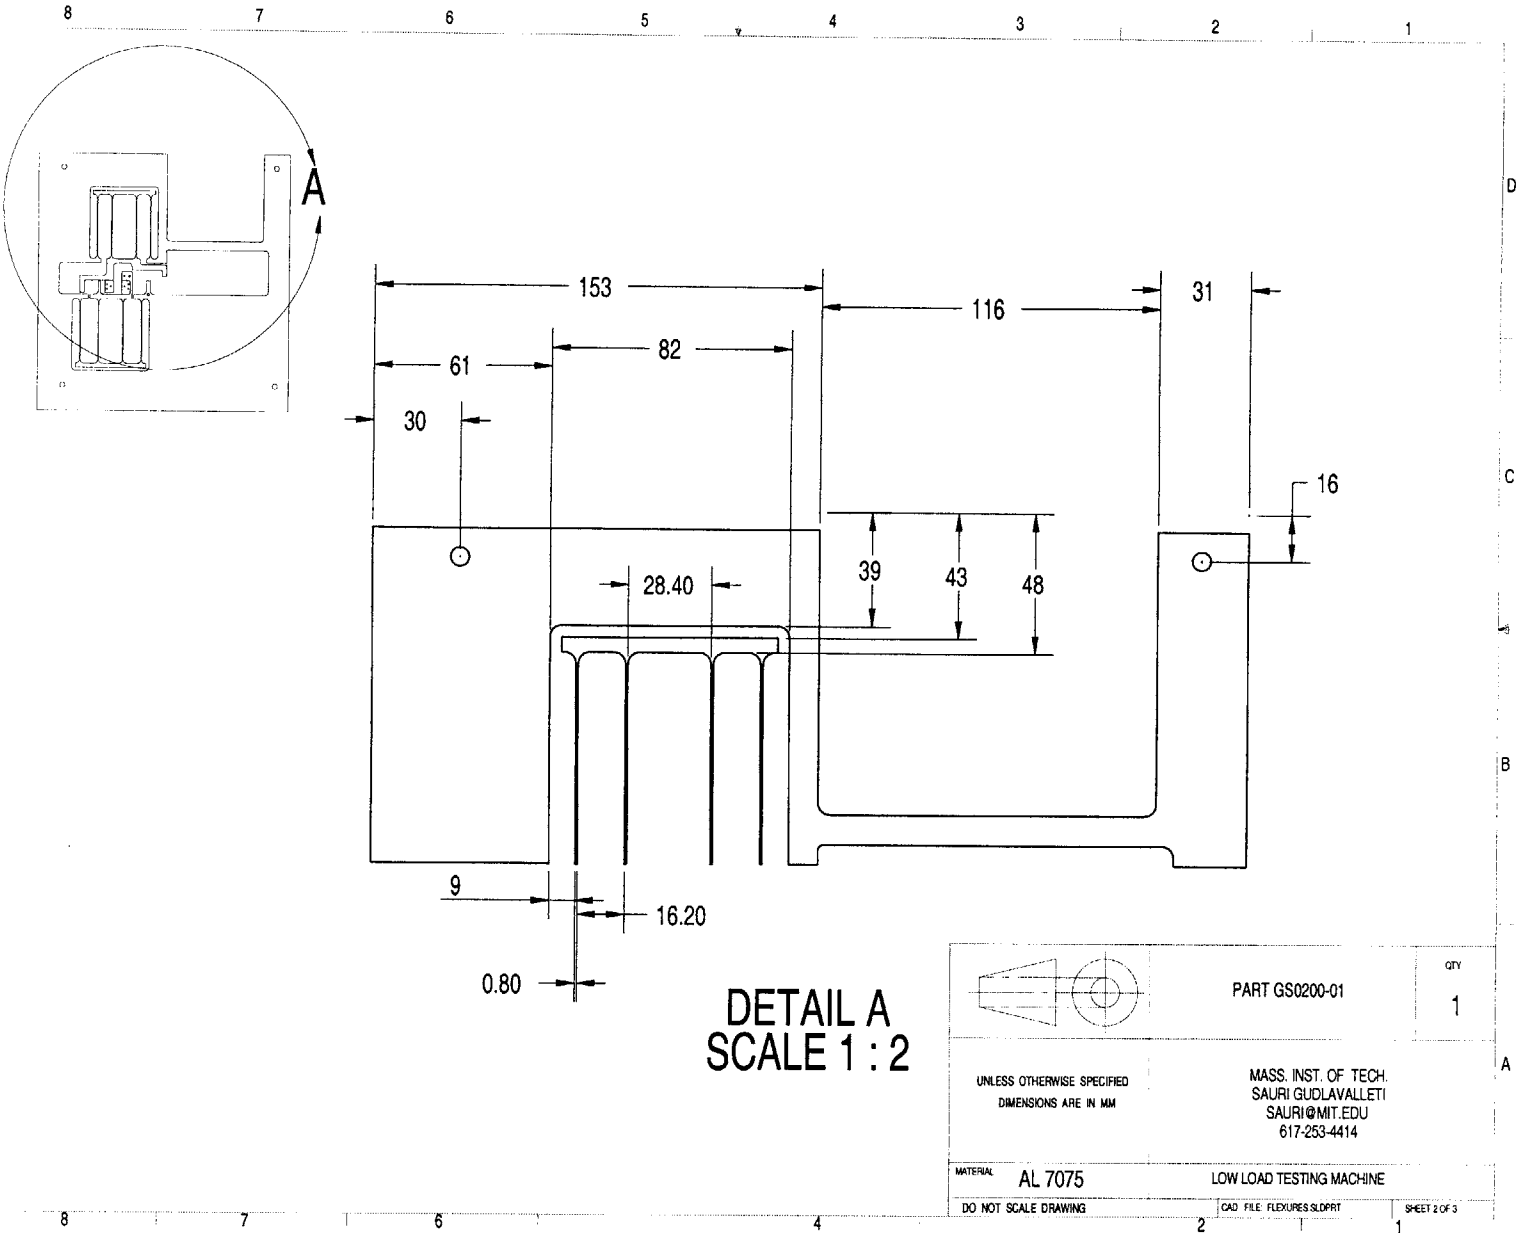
Part GS 0200-01. Low load testing machine flexure frame (Sheet 2 of 3).
